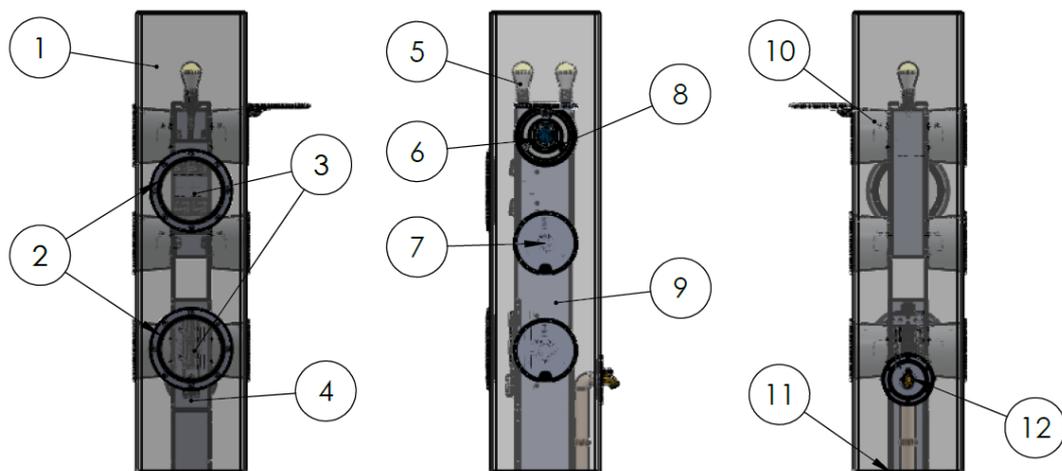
Pedestal overview: 1-Enclosure, 2-Service hatch, 3-Circuit protection devices, 4-Disconnecter, 5-E27 LED lights, 6-Outlet, 7-Outlet lid, 8-Photosensor, 9-Frame, 10-Outlet housing, 11 – Mounting flange, 12-Water faucet.
